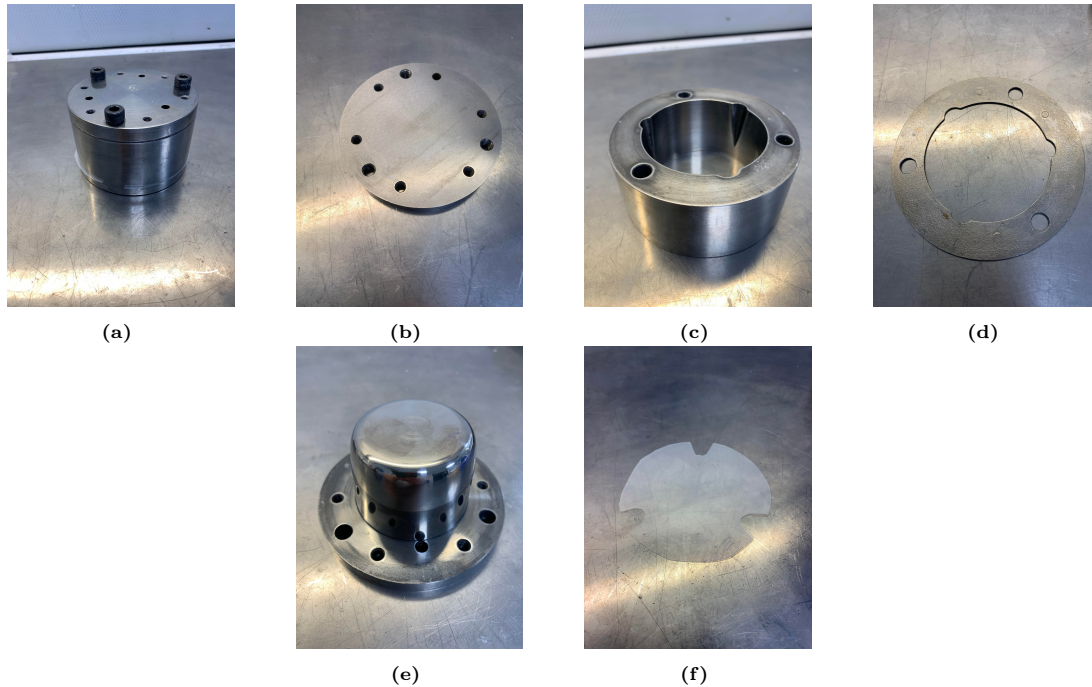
The casting mold and its components: (a) A complete casting mold together with PET foil; (b) Casting mold element 1; (c) Casting mold element 2; (d) Casting mold element 3; (e) Casting mold element 4; (f) PET foil;
